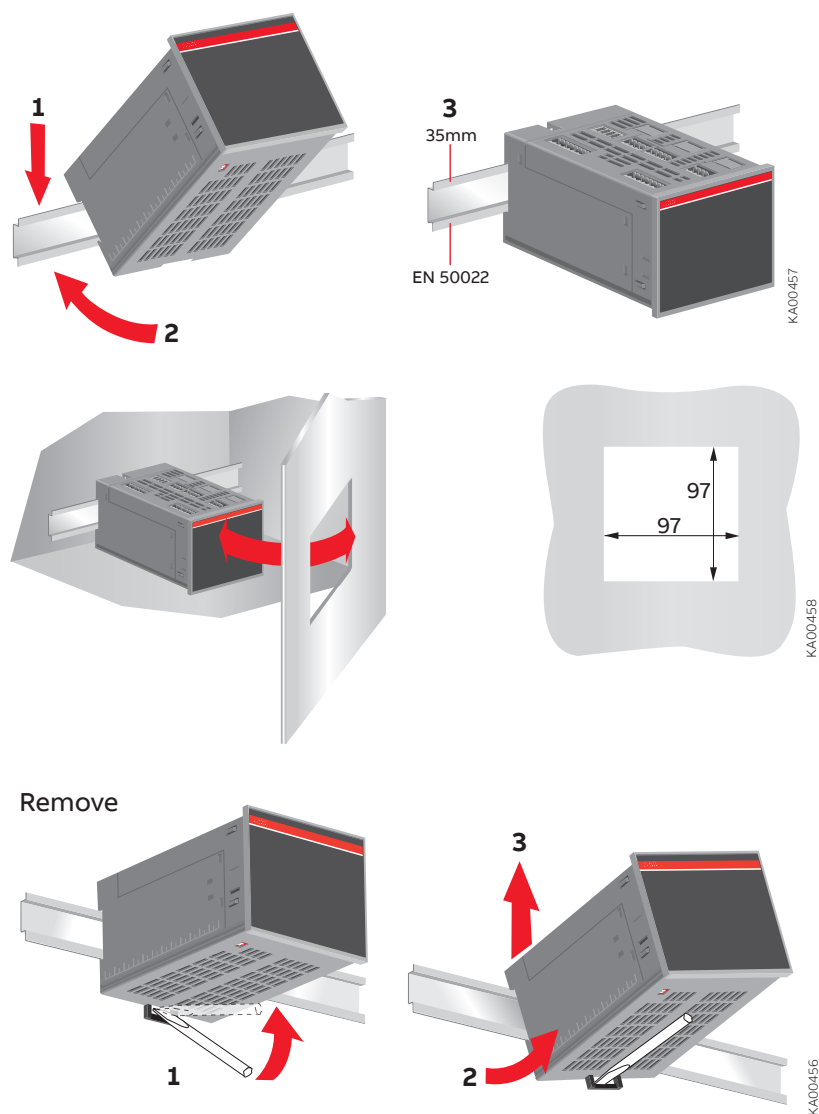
Automatic control unit OMD100, DIN-rail mounting
